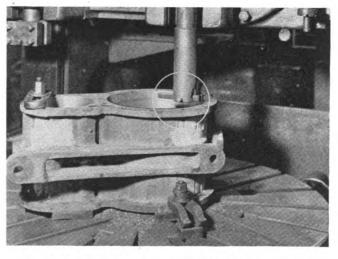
Boring an air-compressor cylinder with a Firthite tool
